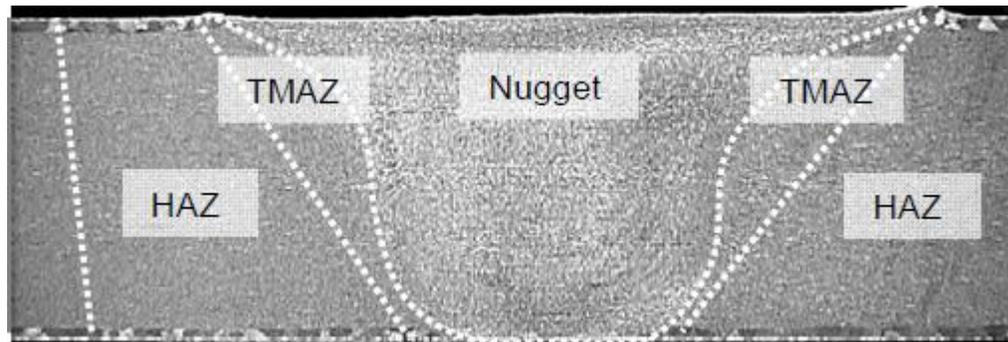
Different type of zones in welded region – weld nugget, thermo mechanically affected zone (TMAZ), and heat affected zone (HAZ).
